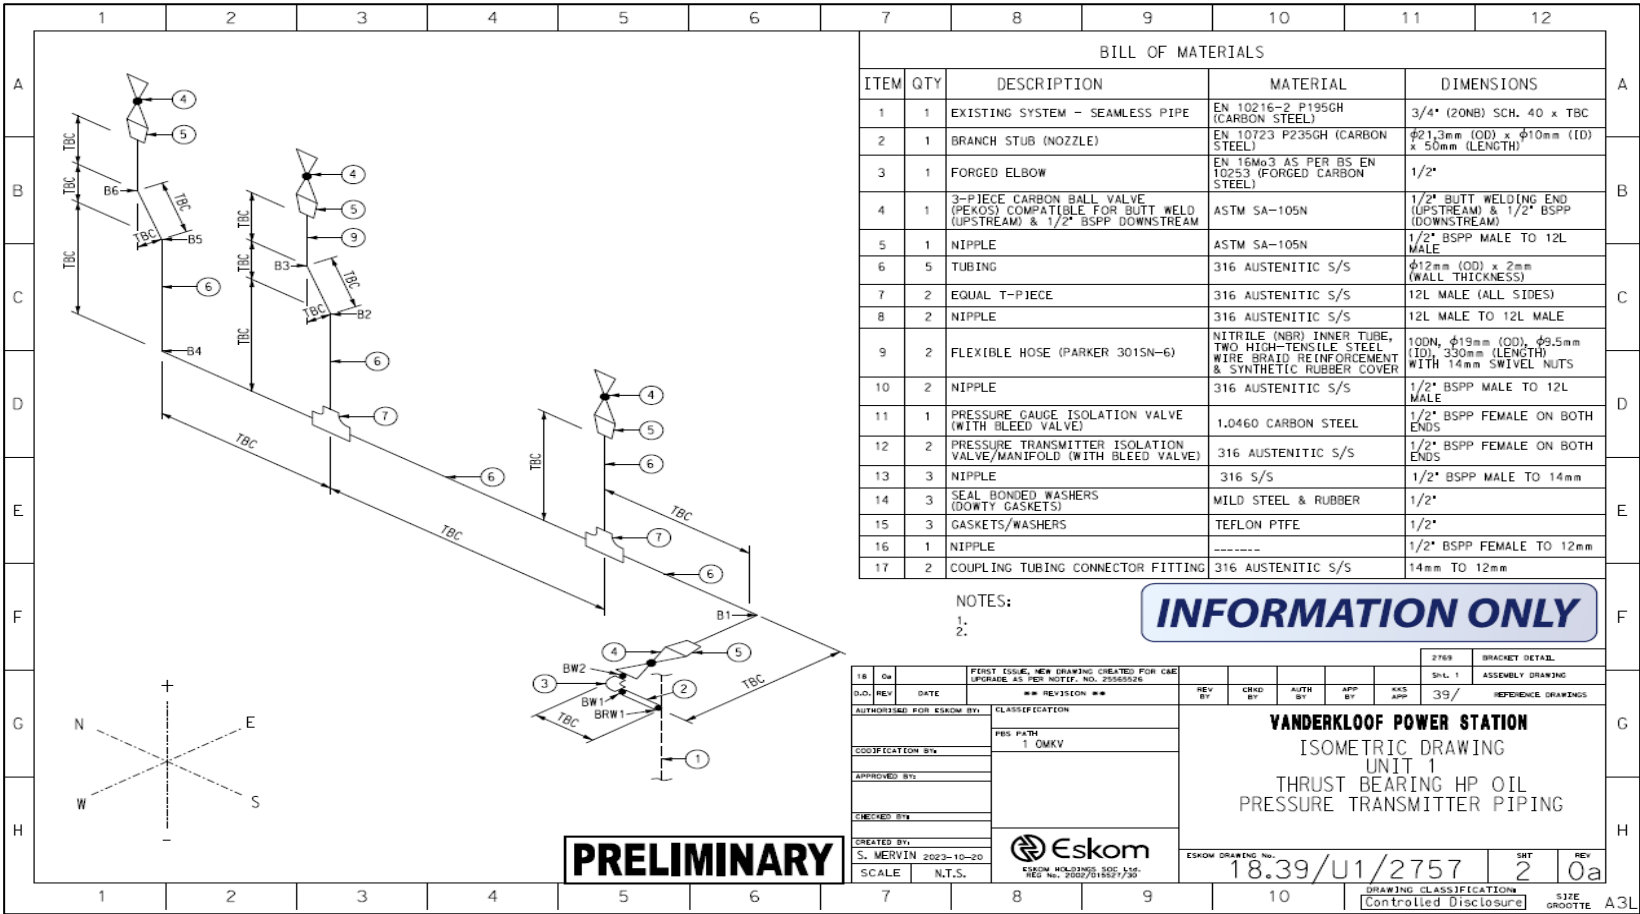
Isometric Drawing Redundant Pressure Transmitter and Gauge piping
